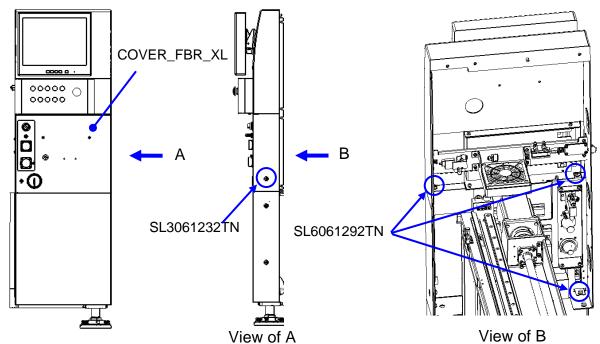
Removal of Cover of Machine with XL Board Specifications
